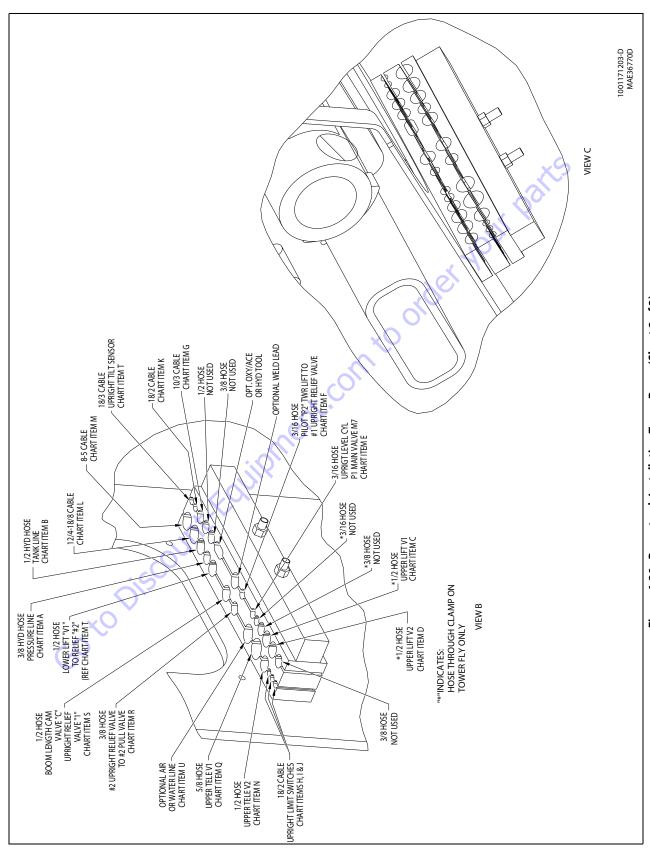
Powertrack Installation Tower Boom (Sheet 2 of 3)
